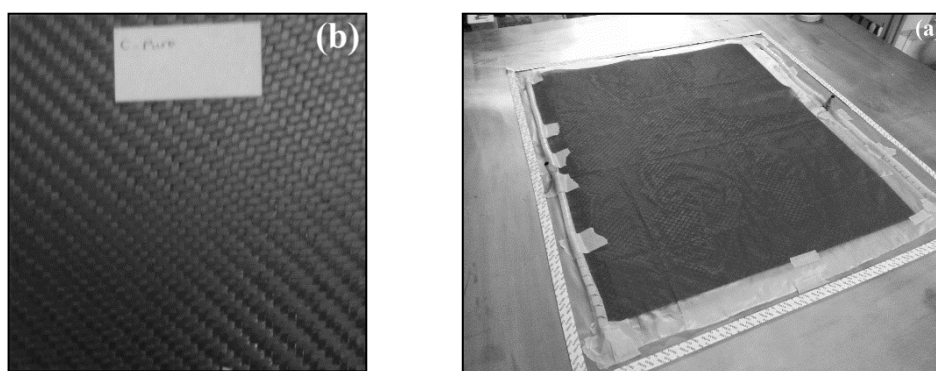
a) Composite plate made by vacuum infusion technique, b) composite specimen for impact test
